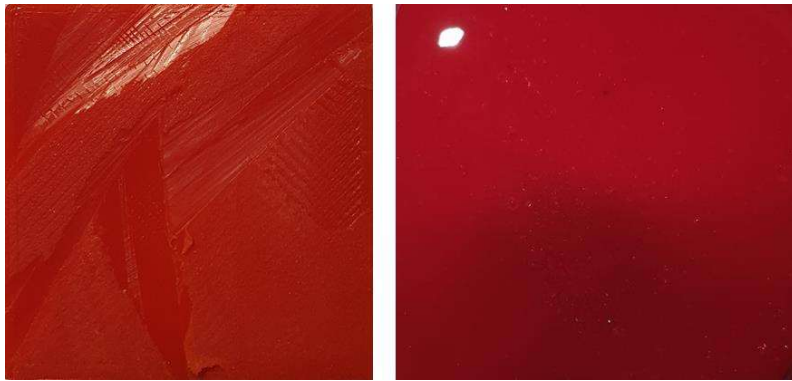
3D printed PETG part before and after post-processing with different grit sandpapers.
